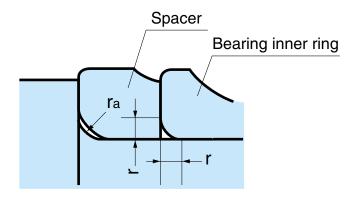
Chamfer Dimension and Radius of Corner Roundness when Using a Spacer
